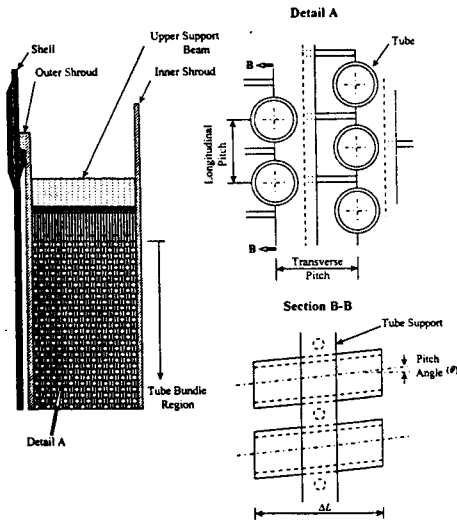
Typical Tube Bundle Arrangement for a Helical Coil SG
